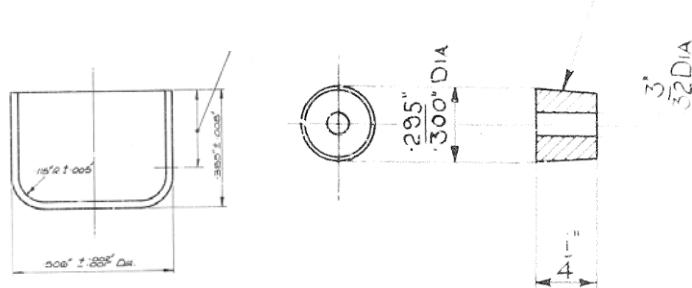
Oilway plug 12G3503 and restrictor 1A1964.
